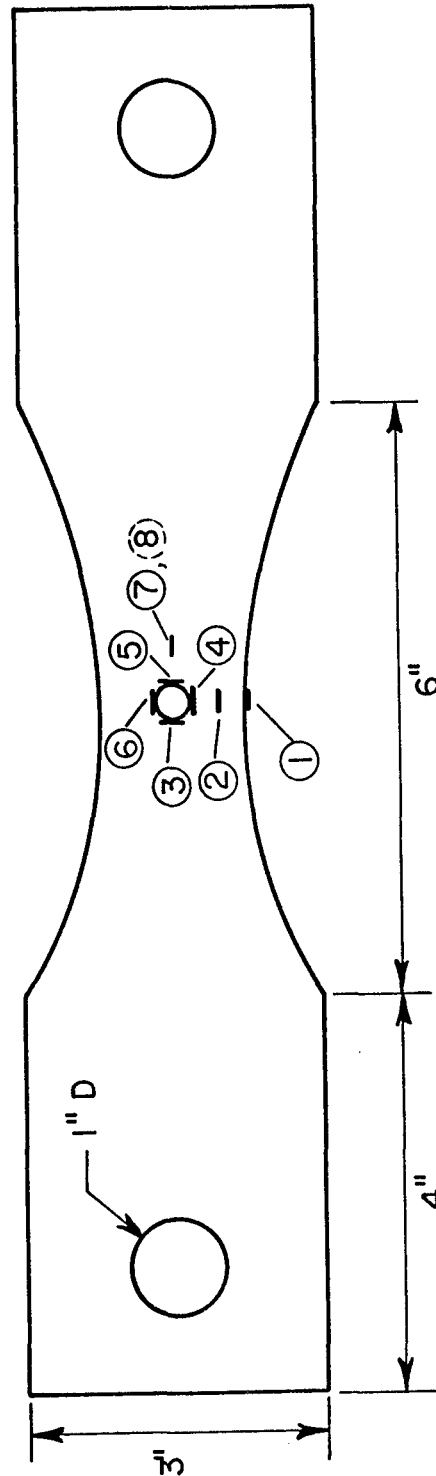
STRAIN GAGE LOCATIONS ON A 7075-T6 ALUMINUM NO-LOAD SPECIMEN
